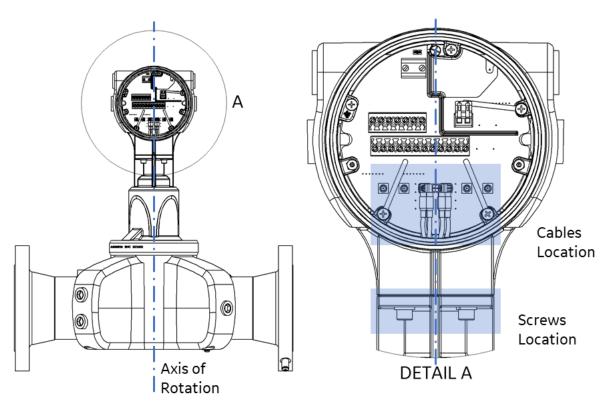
Disassembly Required for XMT1000 Transmitter Rotation (Back View)
